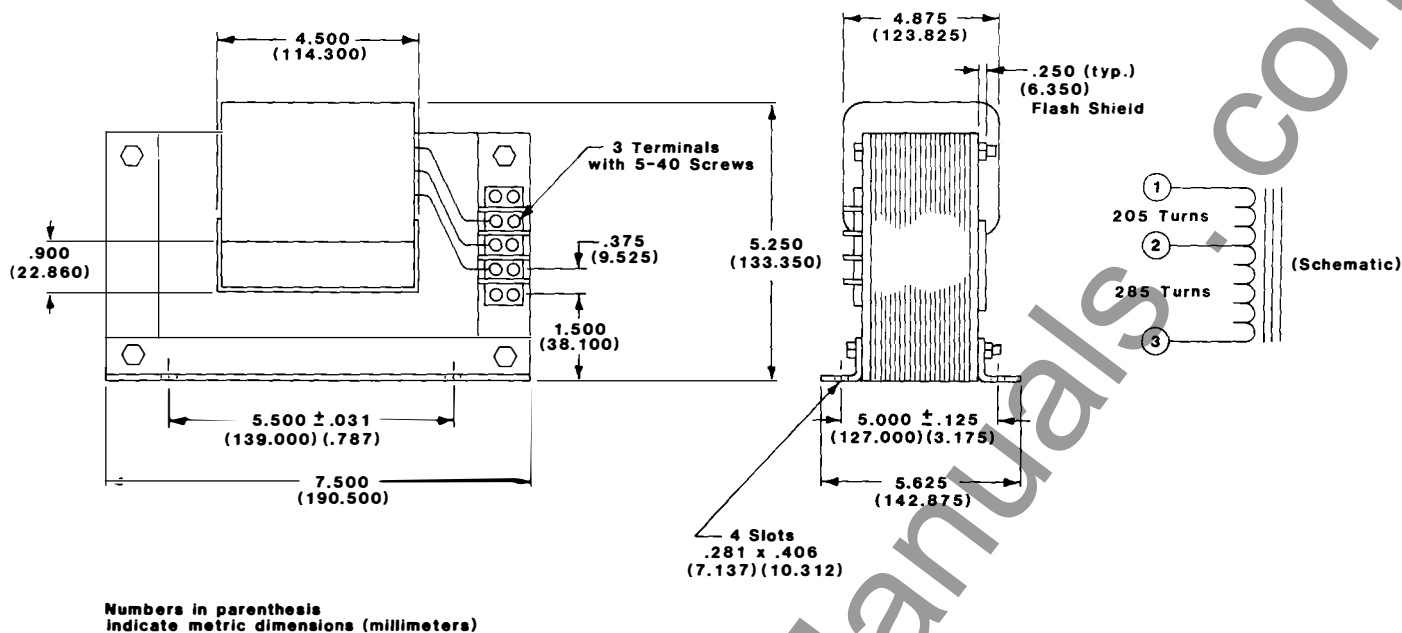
OUTLINE DRAWING, CURRENT TRANSFORMER, P/N BE 15486-001
